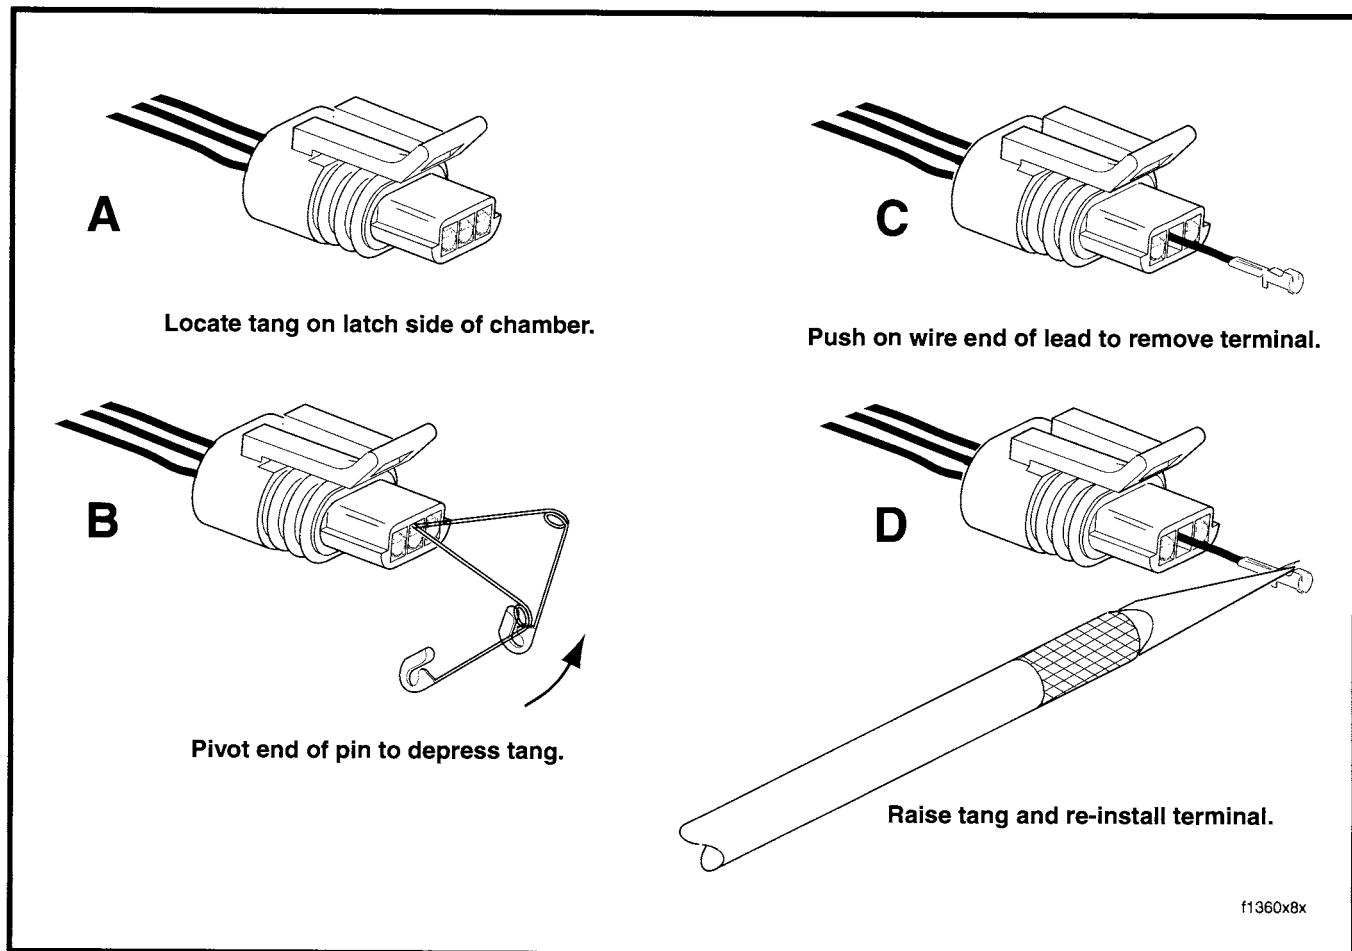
Depress Tang and Extract Terminal From Mating End of Connector
